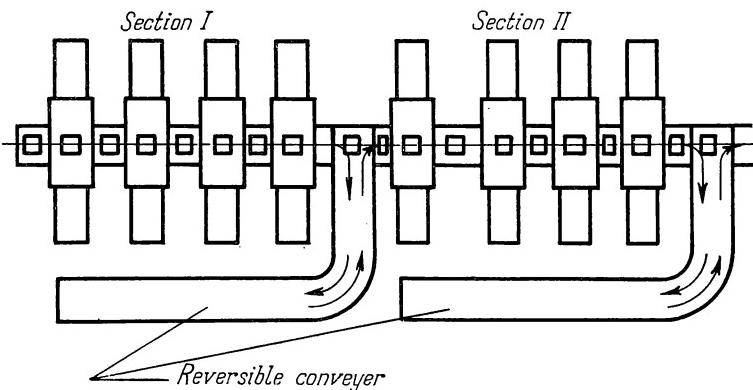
Layout in which stockpile banks for housing-type parts are arranged parallel to the main transfer line
